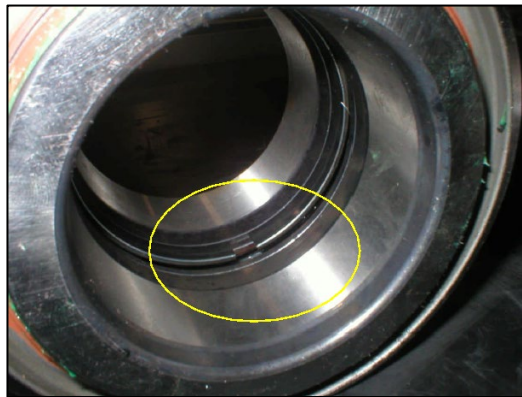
SLIP UNITIZED HUB BEARING OVER SPINDLE
